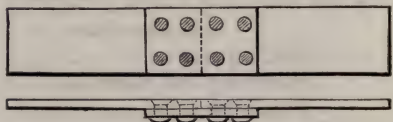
Double-riveted joint, with single welt, countersunk and snap-headed.
